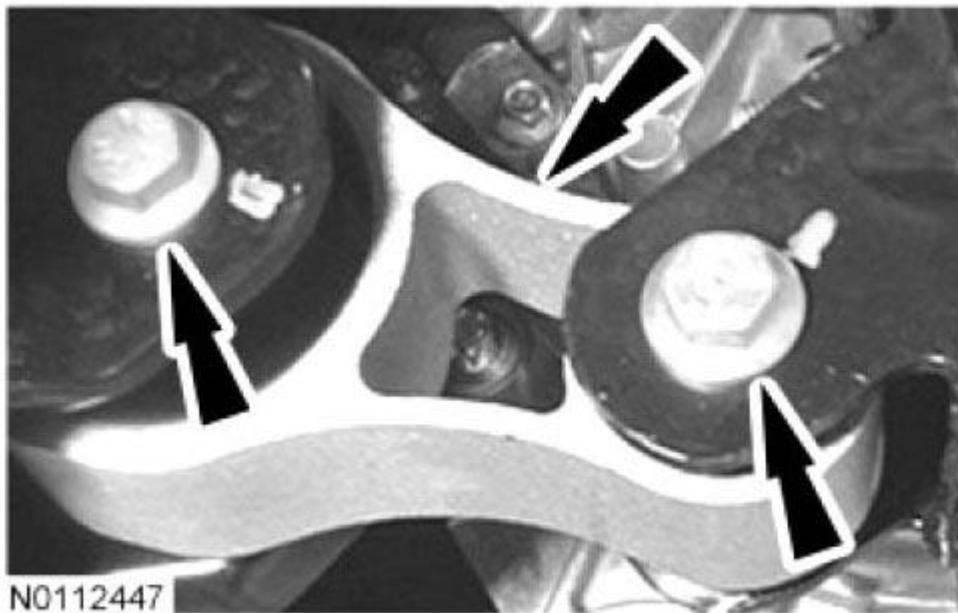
Locating Bolts And Transaxle Roll Restrictor
